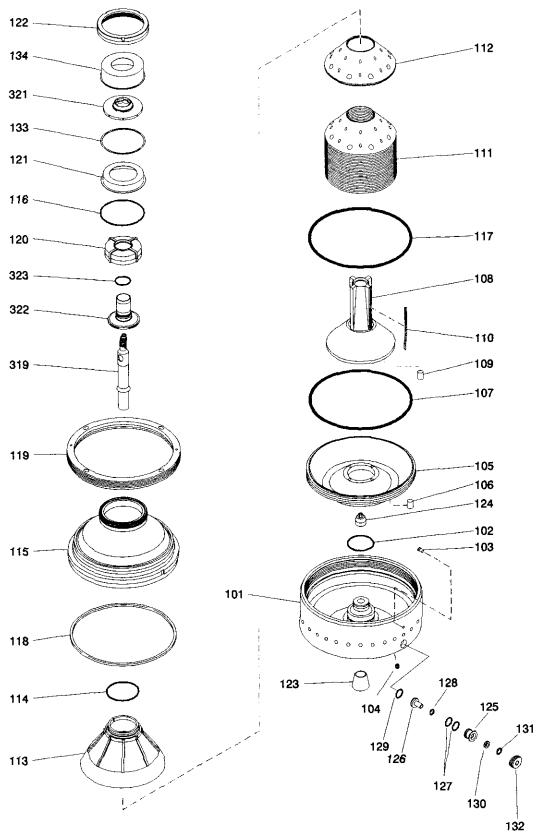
Bowl Assembly Drawing (SJ40F, 50F, 80F)
